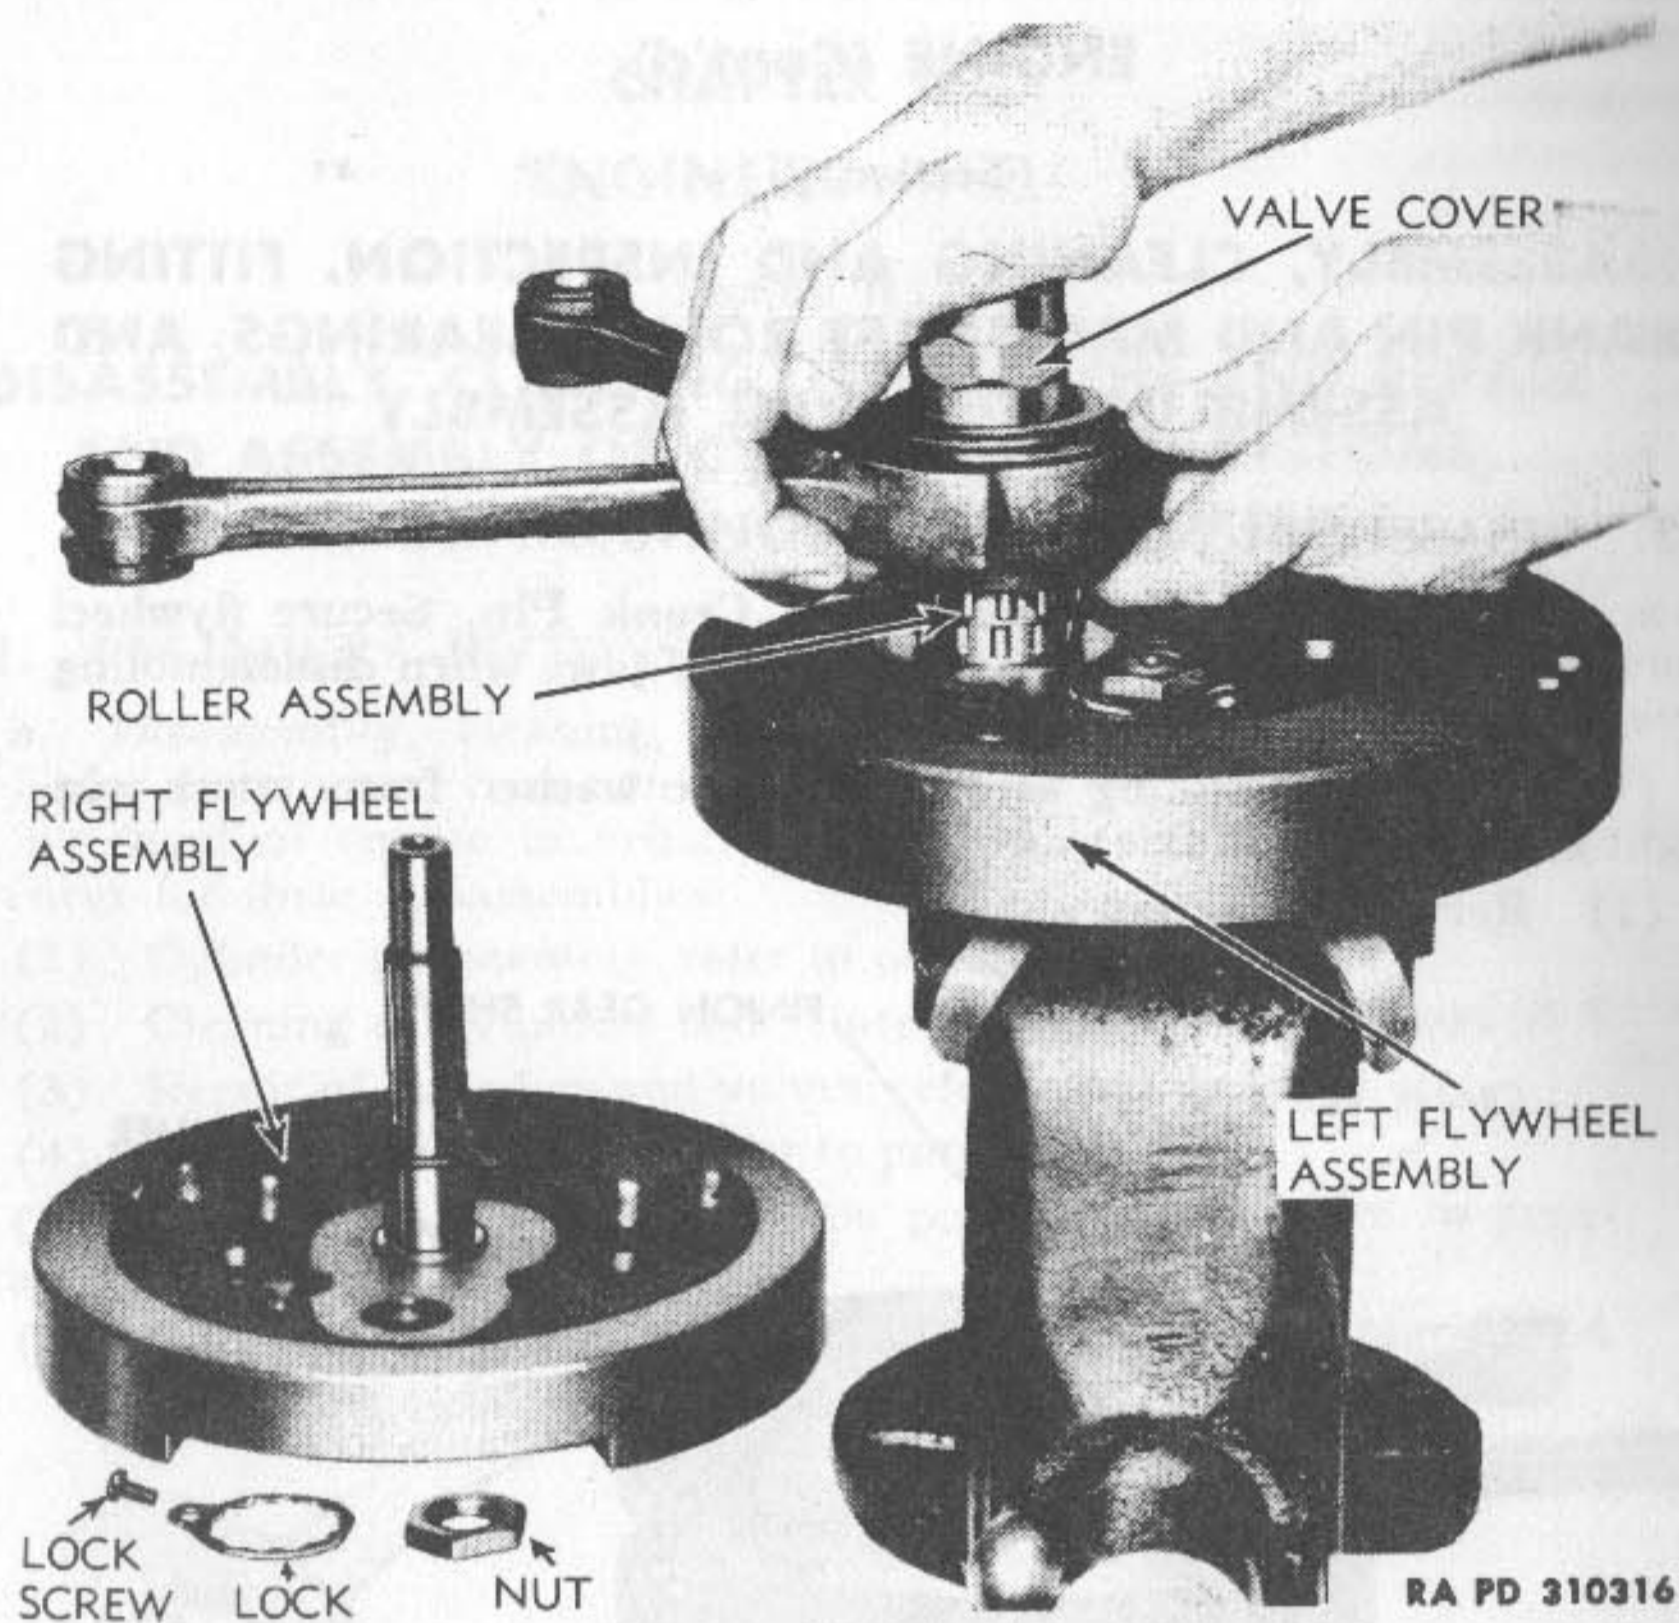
Removing Connecting Rods with Crank Pin Roller Bearing
